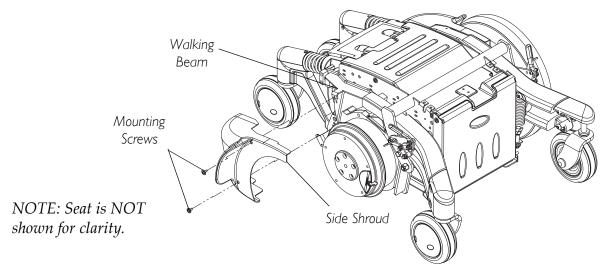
REMOVING/INSTALLING THE SIDE SHROUD ON A GB MOTOR
